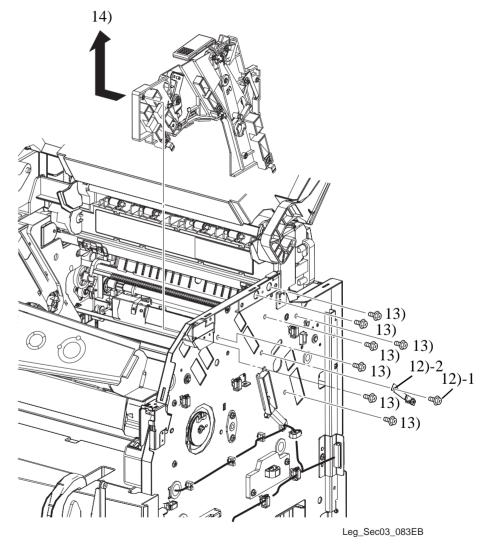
Removal of GUIDE CRU ASSY AD (3)
